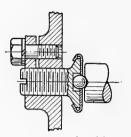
Combination pivot joint and end-thrust bearing, the ball being retained by the washer spun over the fixed screw.
